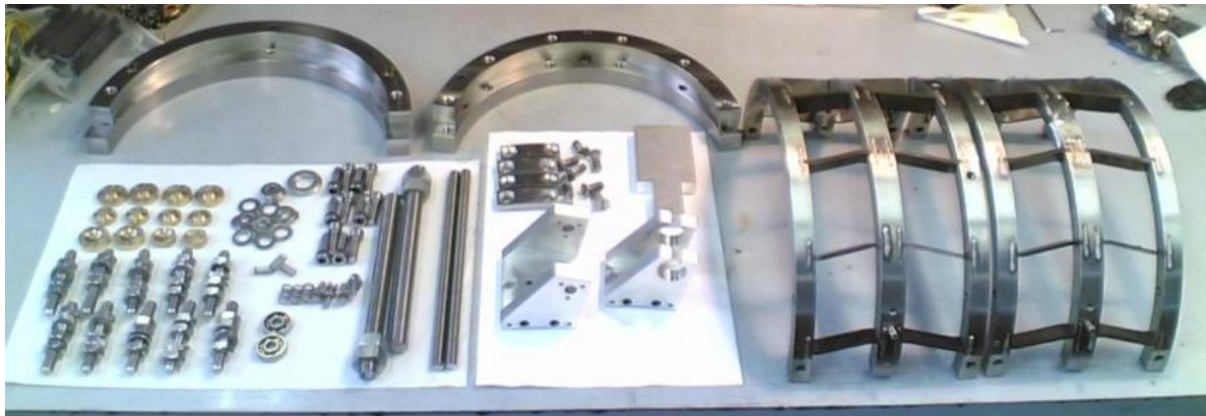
The tuner parts ready to be assembled before the DESY cold test
